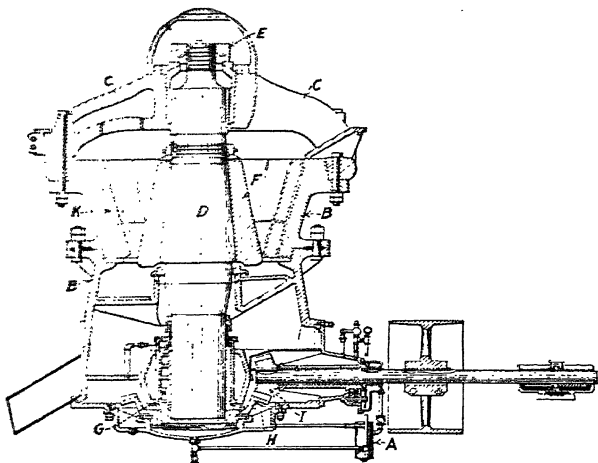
Sectional view of a gyratory crusher. (From C. E. Locke.)
